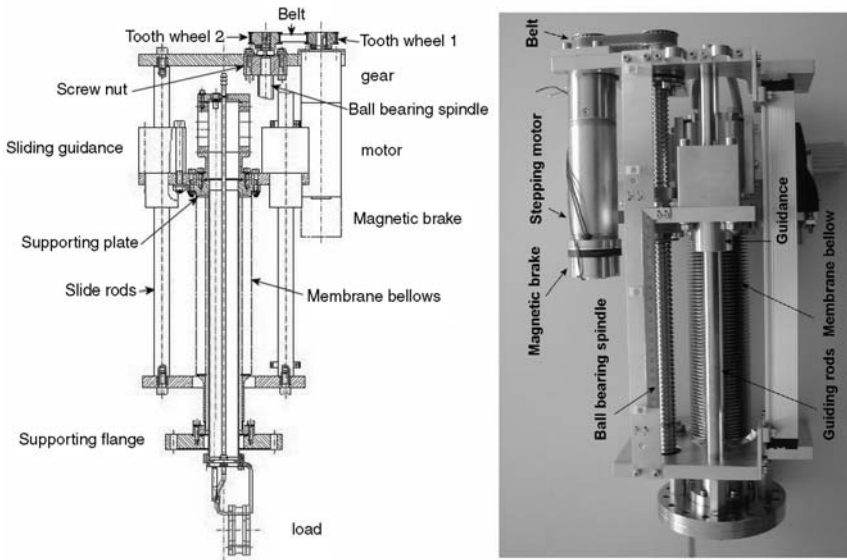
Schematic drawing and picture of a motor driven feedthrough [299]
